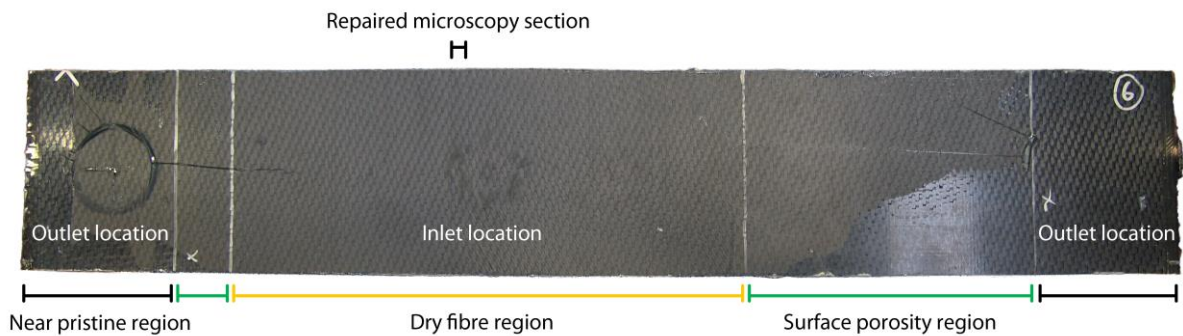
Injection-repaired top surface of sample '6', highlighting the cross-section used for microscopy.
